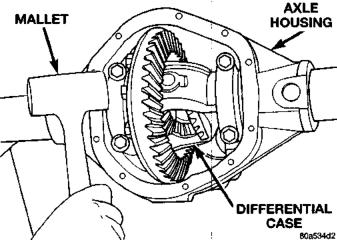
Seat Pinion Gear Side Differential Dummy Side Bearing
